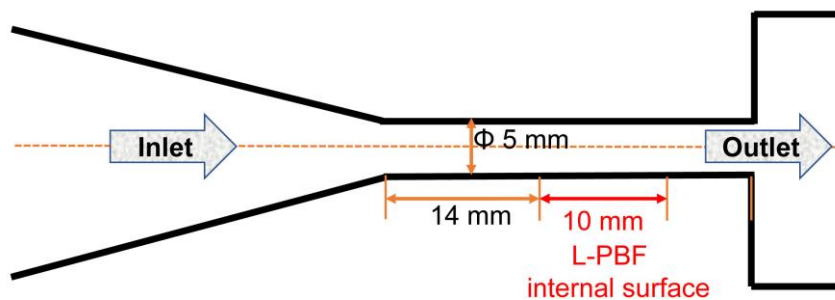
Dimension design of cross section of the inlet of polishing chamber in AFP.
